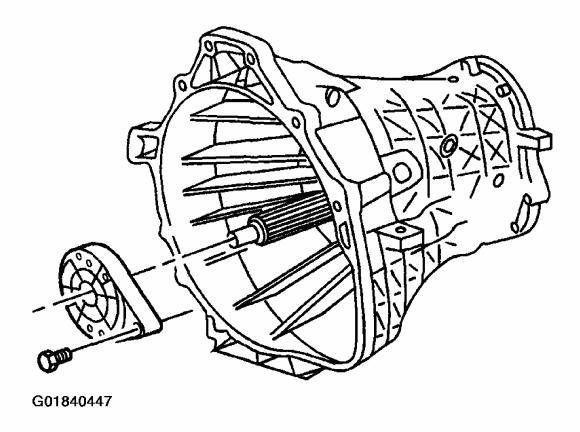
Installing Input Shaft Bearing Retainer-To-Clutch Housing
